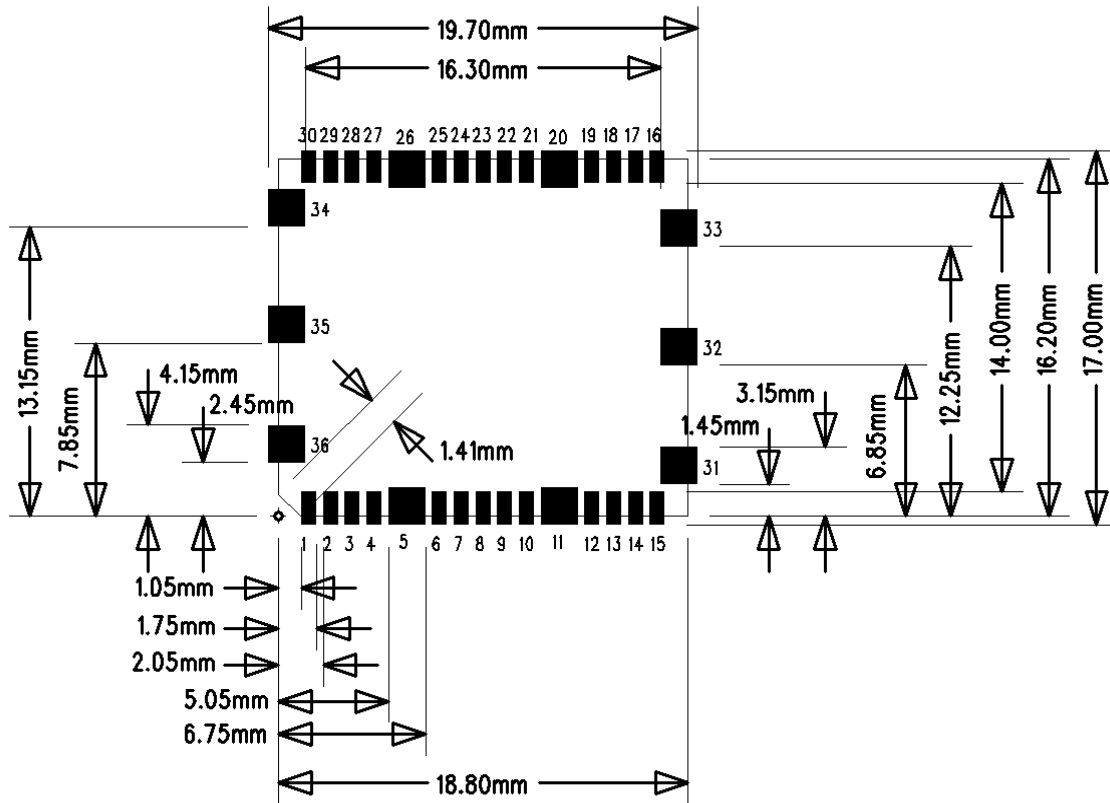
Suggested pad layout and occupied area, Top view. Suggested paste mask openings equal pad layout
